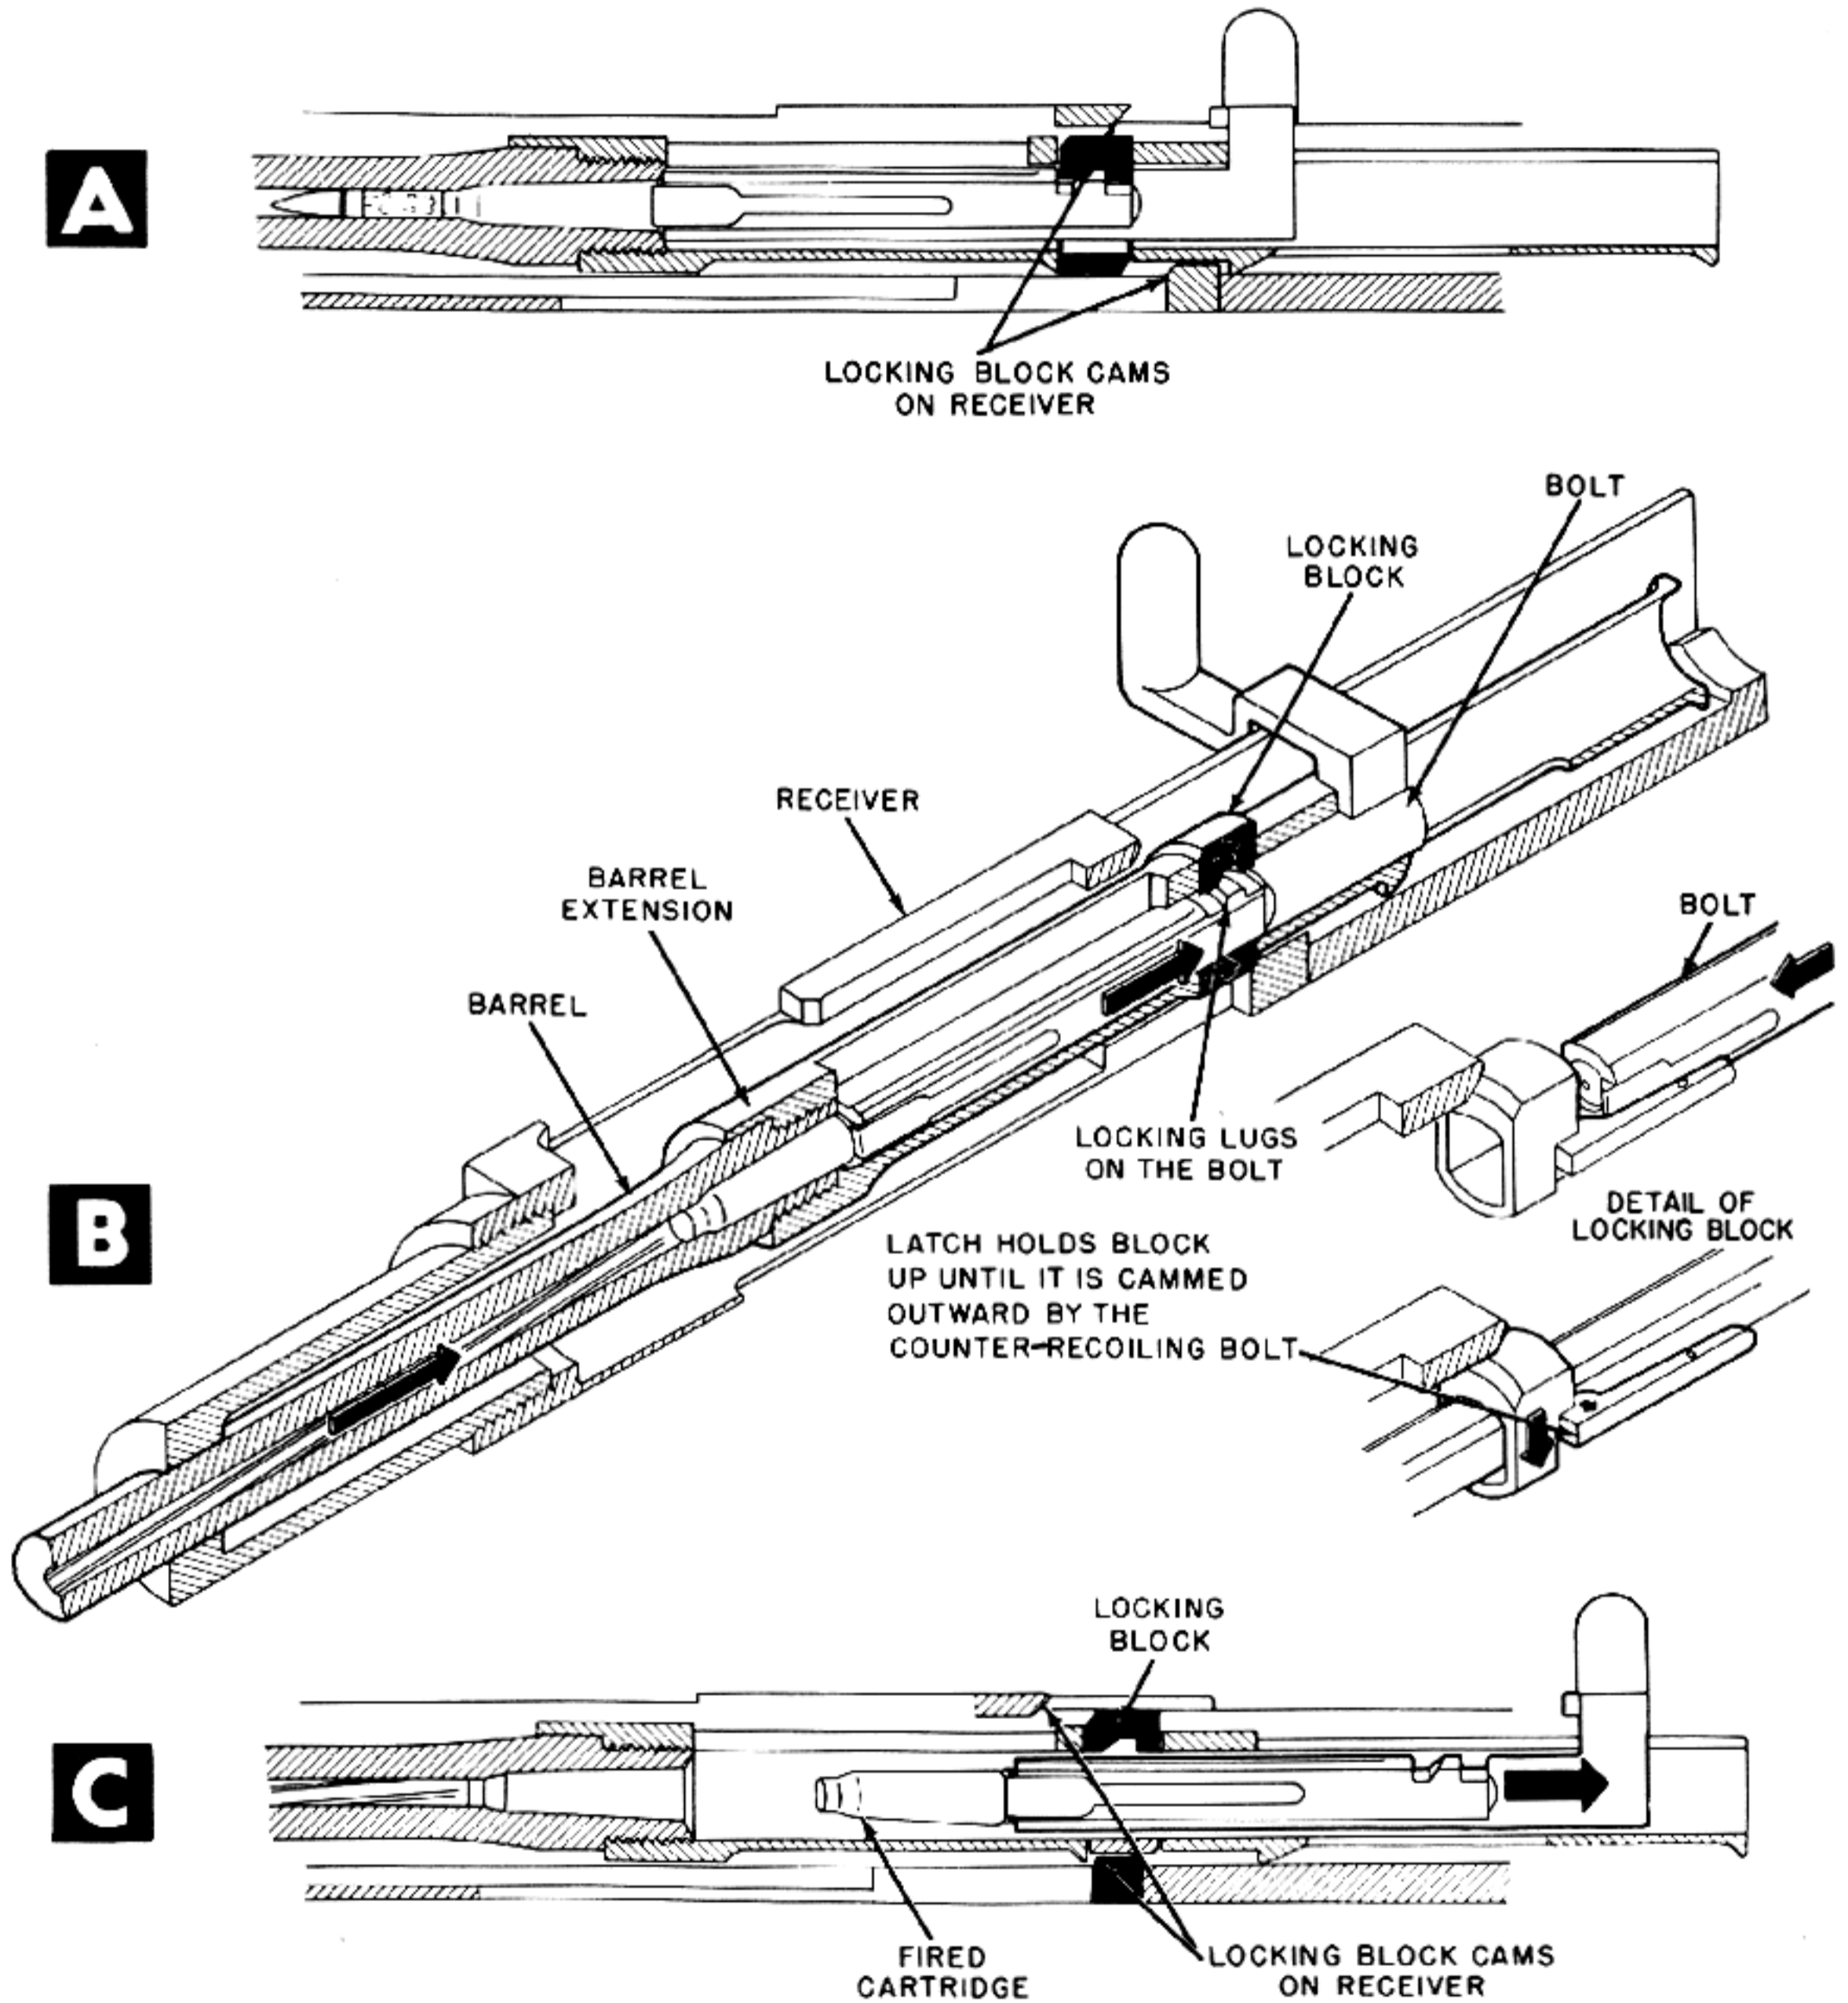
Recoiling Barrel Extension Cams Locking Block Free of the Bolt.
